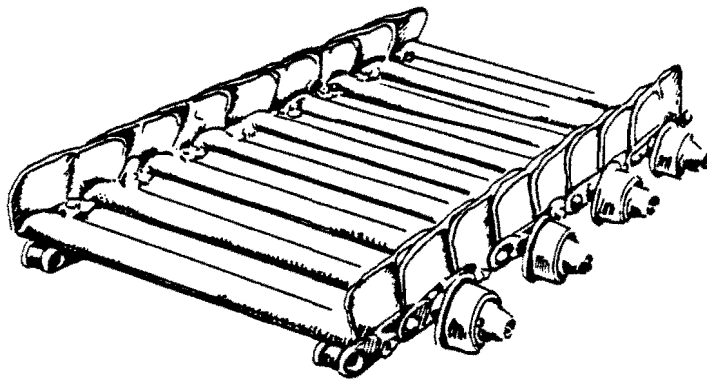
TYPICAL CONVEYOR INSTALLATIONS
